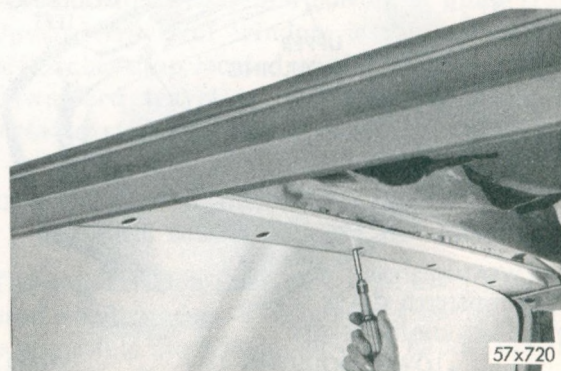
Removing or Installing Moulding Retaining Screws (Imperial Models)
